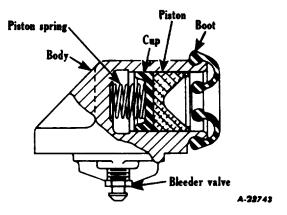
Typical Single Piston Wheel Cylinder (Cross Sectional View)
